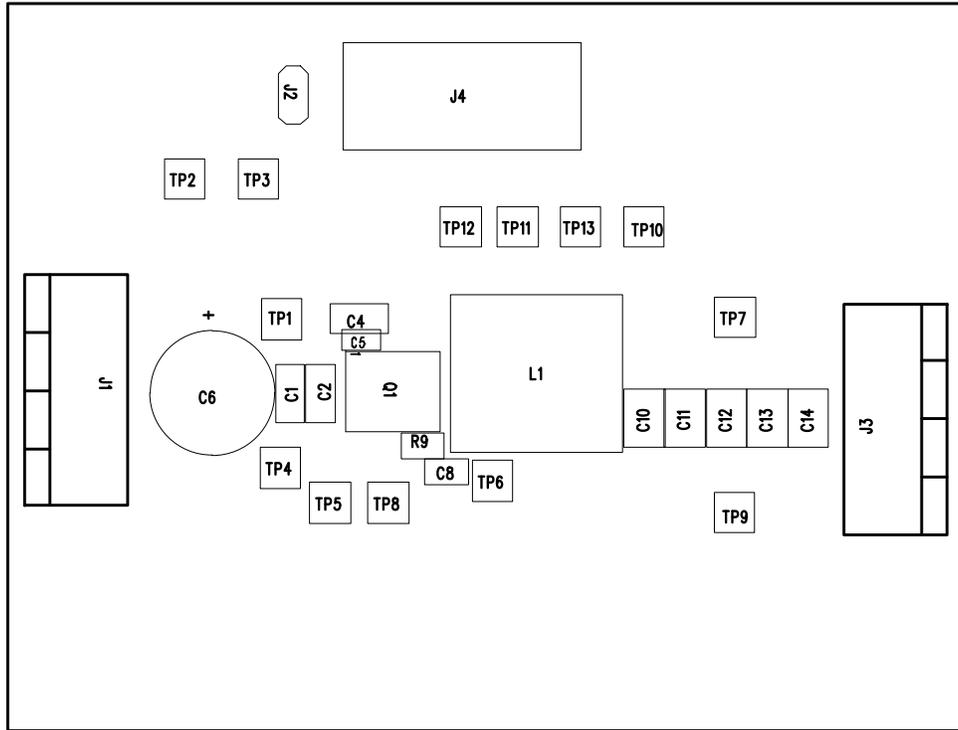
TPS53819AEM-123 Top Layer Assembly Drawing (Top View)
